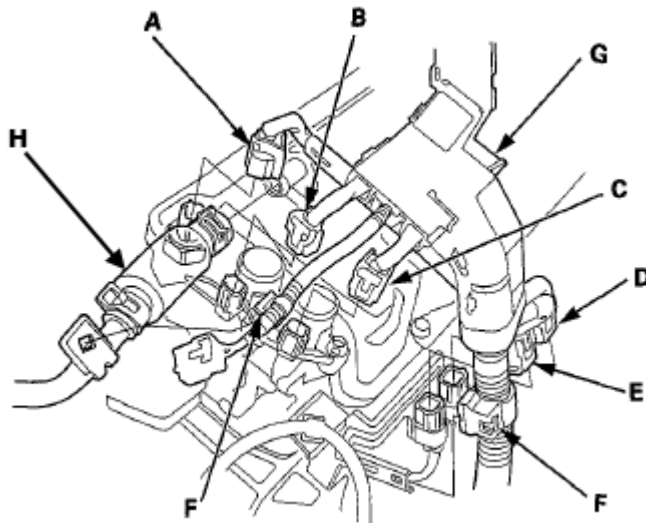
Identifying Rear Rocker Arm Oil Pressure Switch Connector
